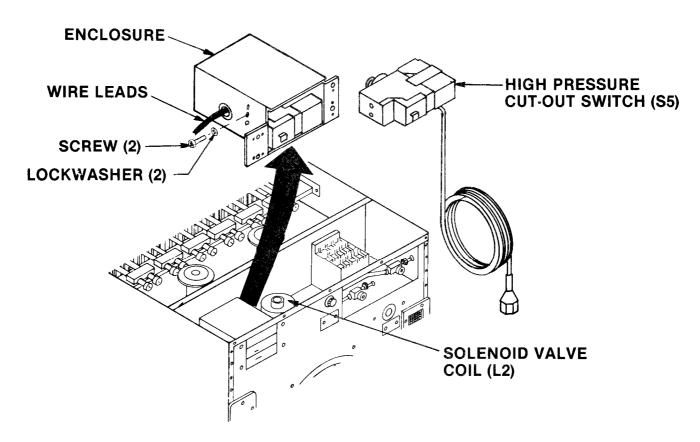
High Pressure Cut-Out Switch (S-5)
